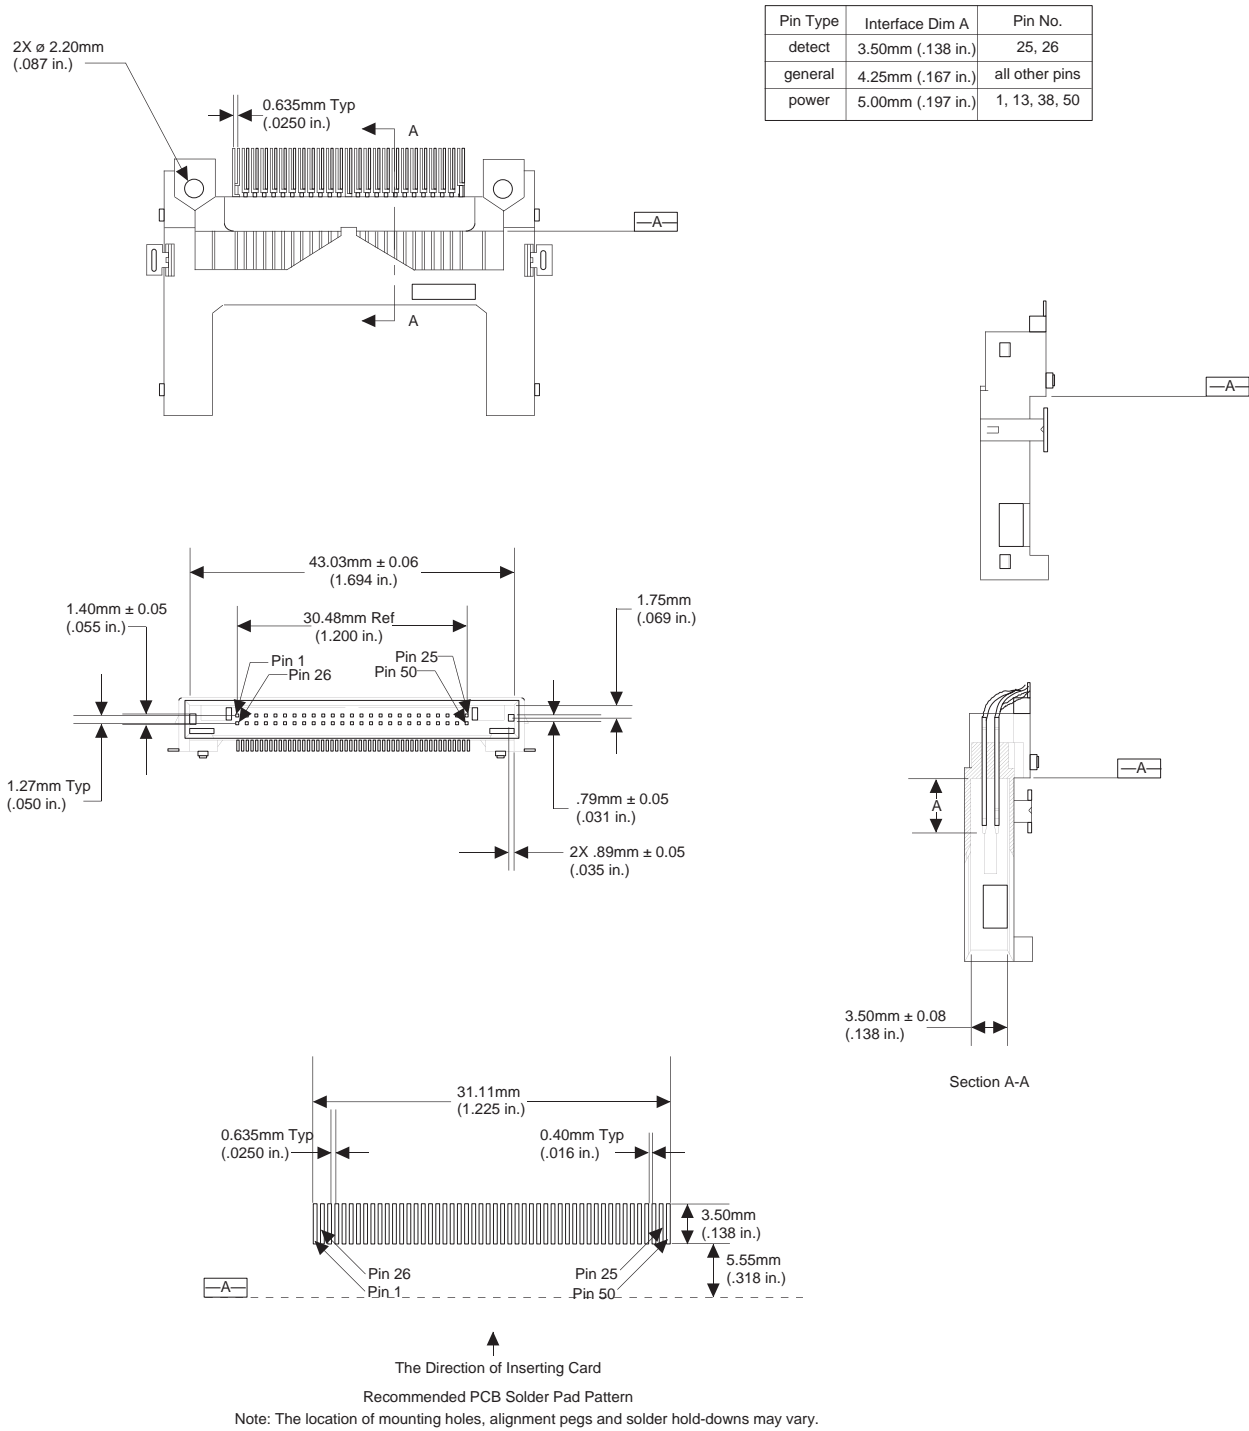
Surface Mount Right Angle CF/CF+ Type I Card Slot Header
